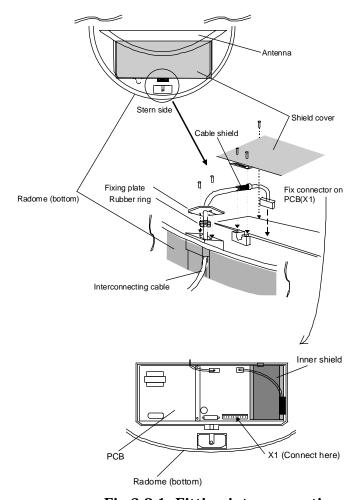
Fitting interconnecting cable (RA40C)
